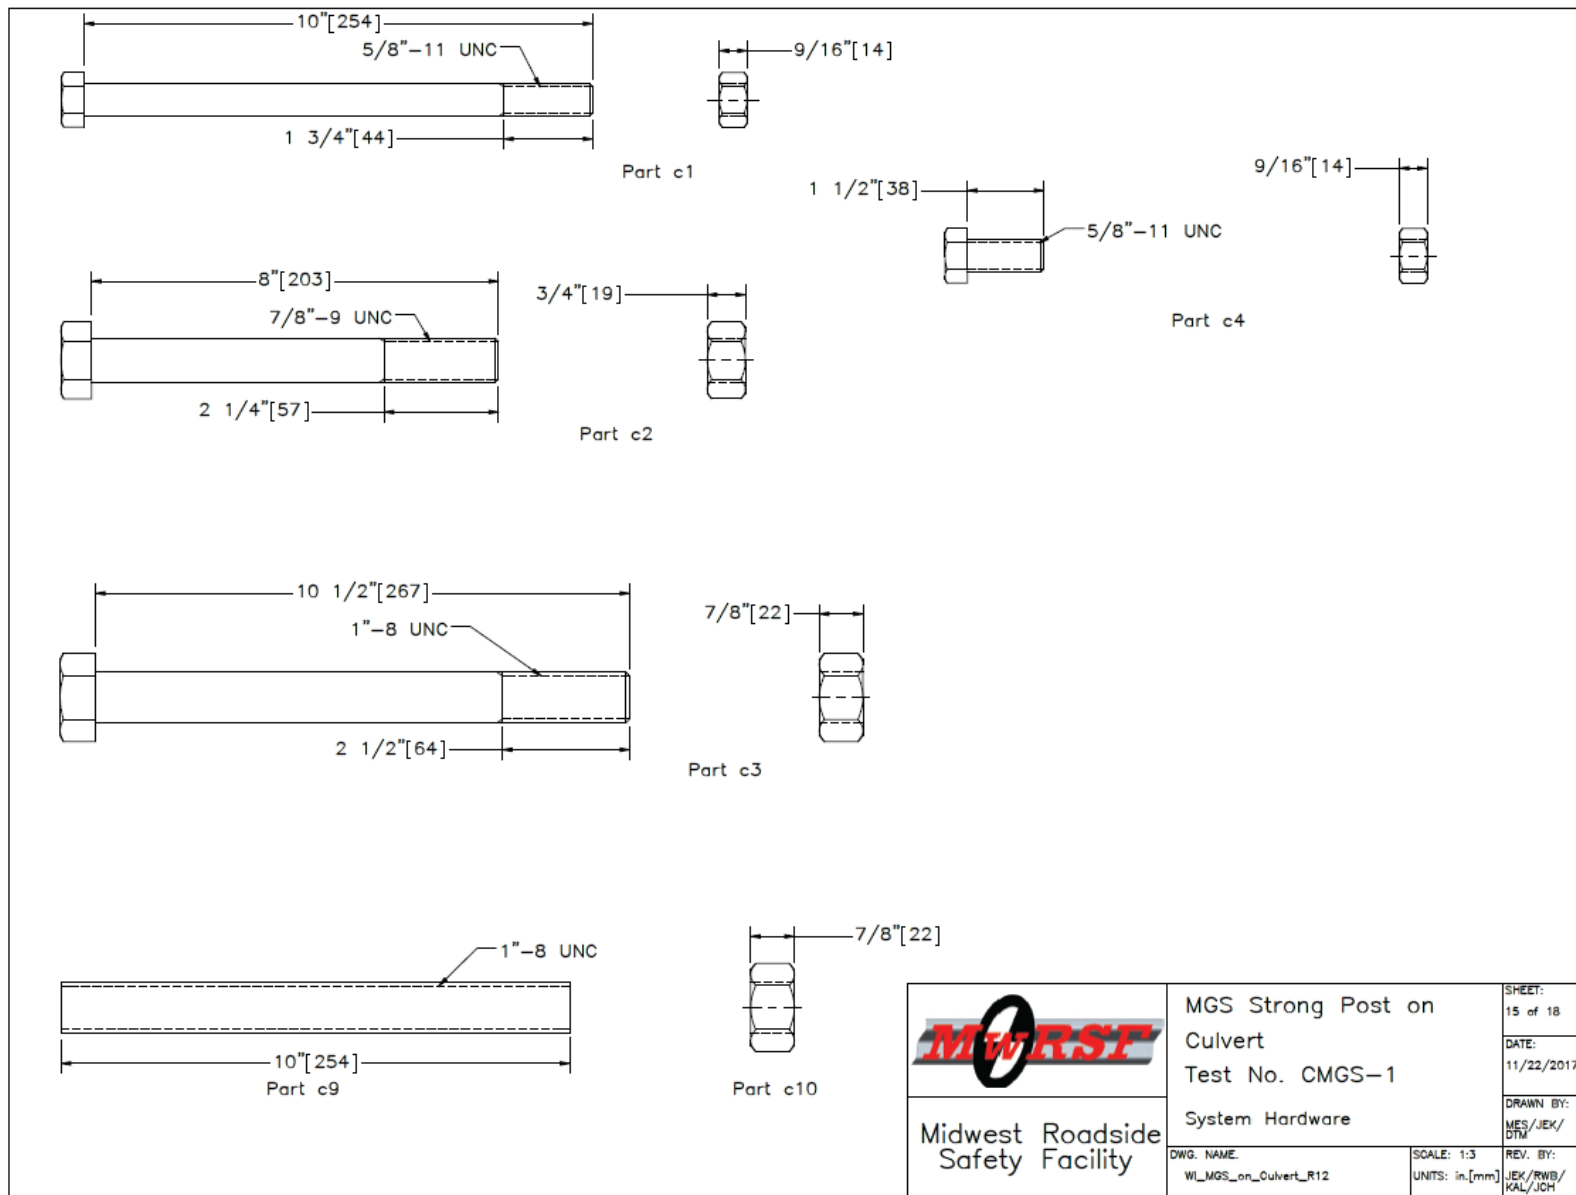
System Hardware Details, Test Nos. CMGS-1 and CMGS-2
